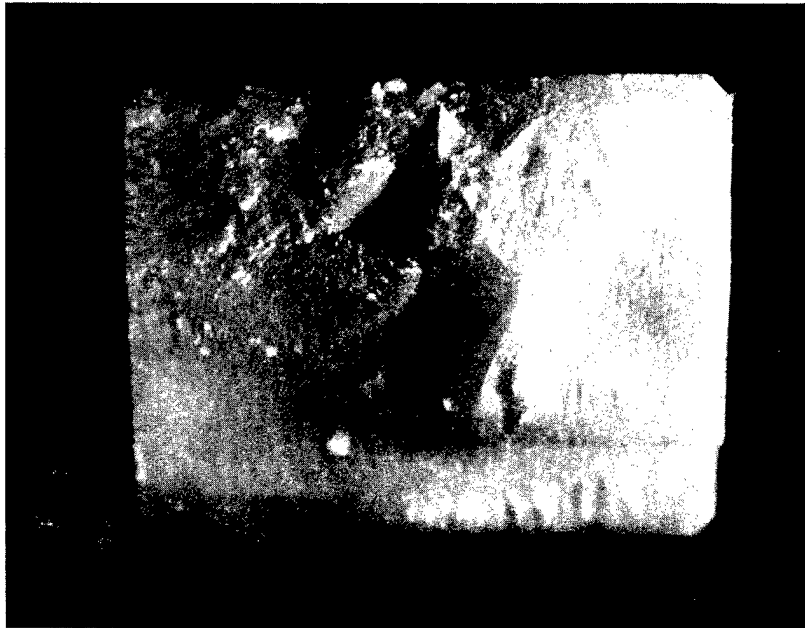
Typical fracture surface of EC-152 tested at 1000°C, 20X.
